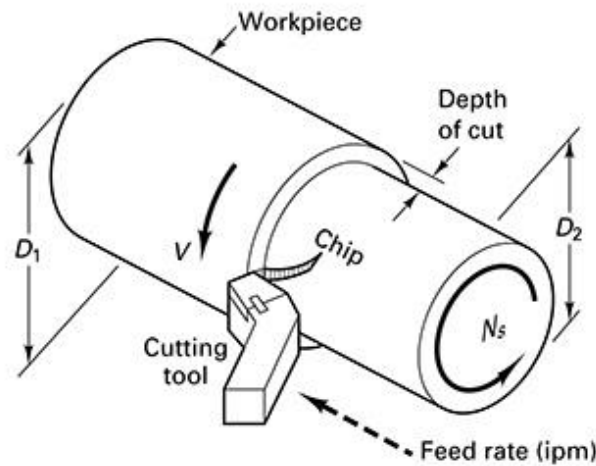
Turning a cylindrical workpiece on a lathe requires you to select the cutting speed, feed, and depth of cut.
